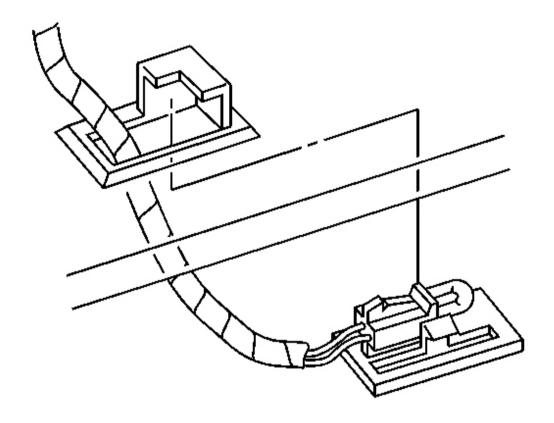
IP Courtesy Lamp To IP Lower Closeout Panel Courtesy of GENERAL MOTORS CORP.
